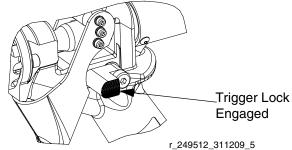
Trigger Retainer Unlocked and Trigger Lock Engaged
